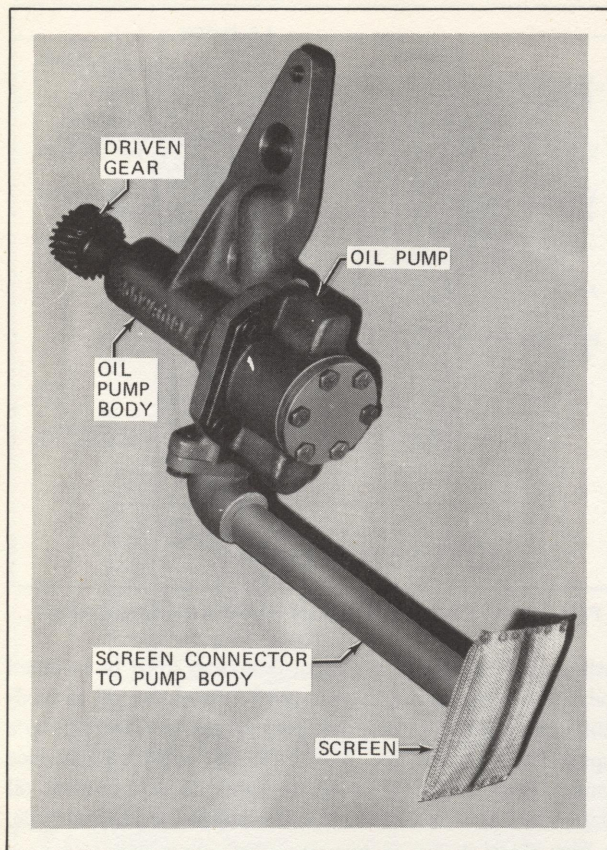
NEW GEAR TYPE LUBE PUMP (STARTING WITH WBG-9510 AND WBO-9516).
